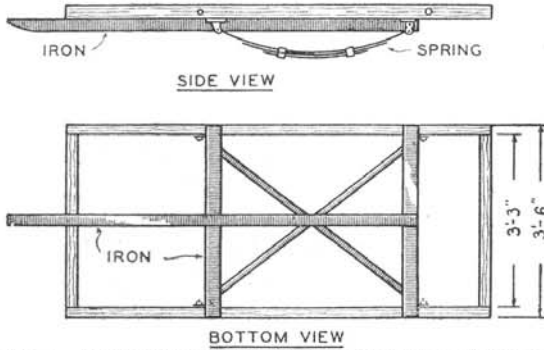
The angle iron cross braces should be welded, as explained in the accompanying text.
